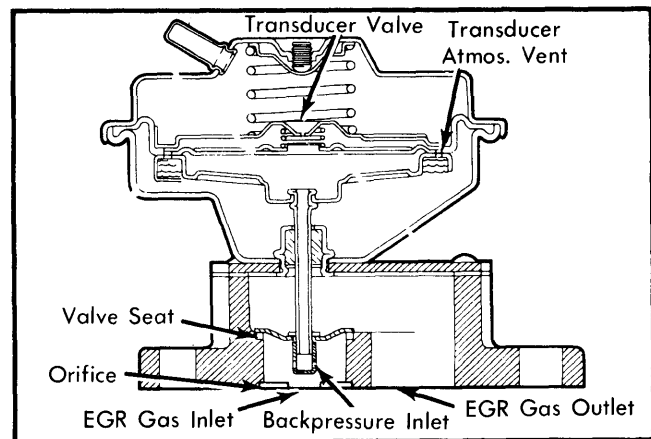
Integral Type Backpressure Transducer and EGR Valve
